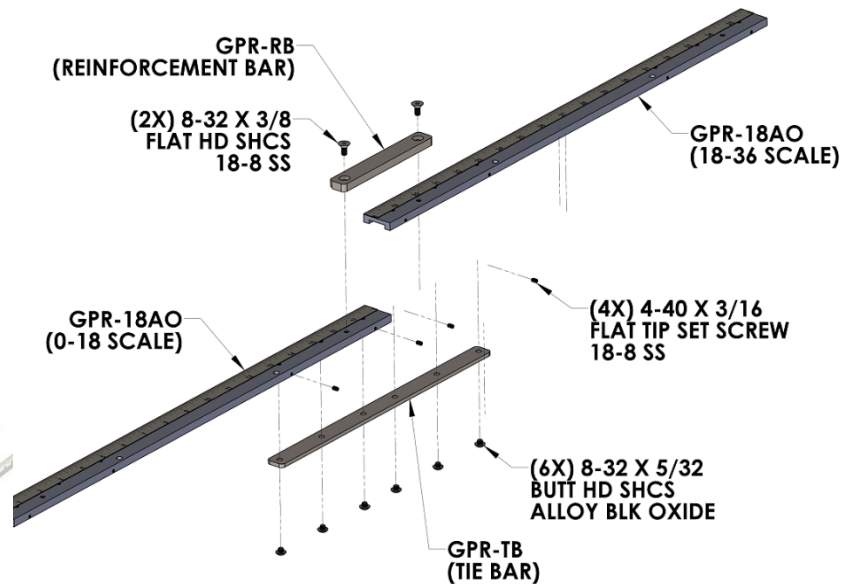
A-703SP-SE-EXT-A/B Target Straight-Edge
